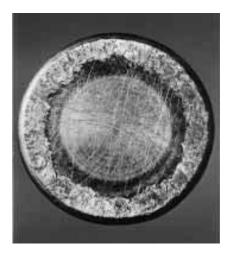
A cylindrical roller with end smearing caused by heavy axial loading and improper lubrication
